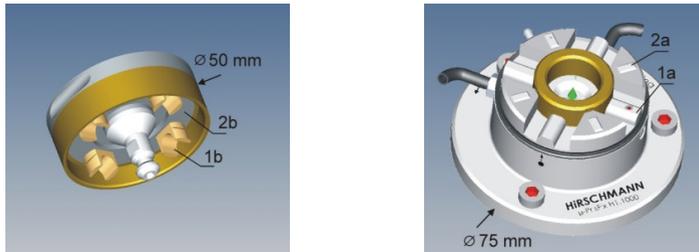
Mini clamping system with clamping fixture (right) and pallet (left). 1a, 1b: centering prisms; 2a, 2b: height supports, total height of the clamping system: 50 mm.
